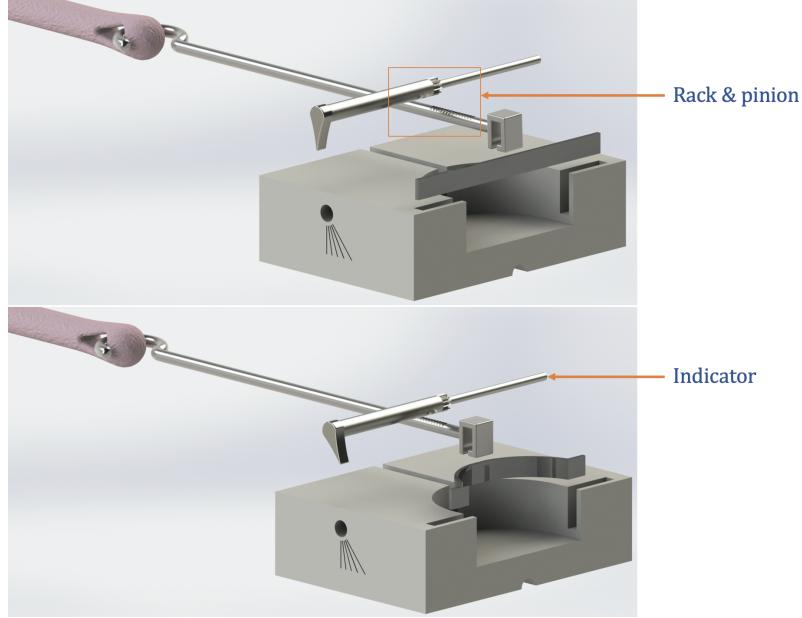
Annotated Solidworks image of the device's stiffness indicating mechanism. Top: initial position. Bottom: example final position.
